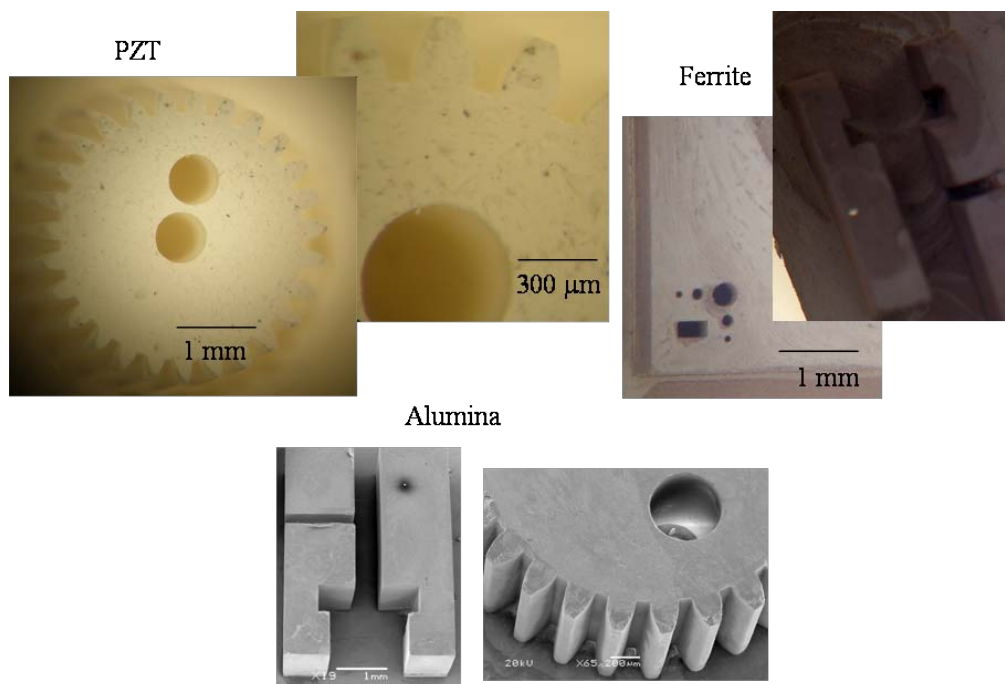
PZT, ferrite and alumina 3-D shaped samples obtained by gelcasting.
